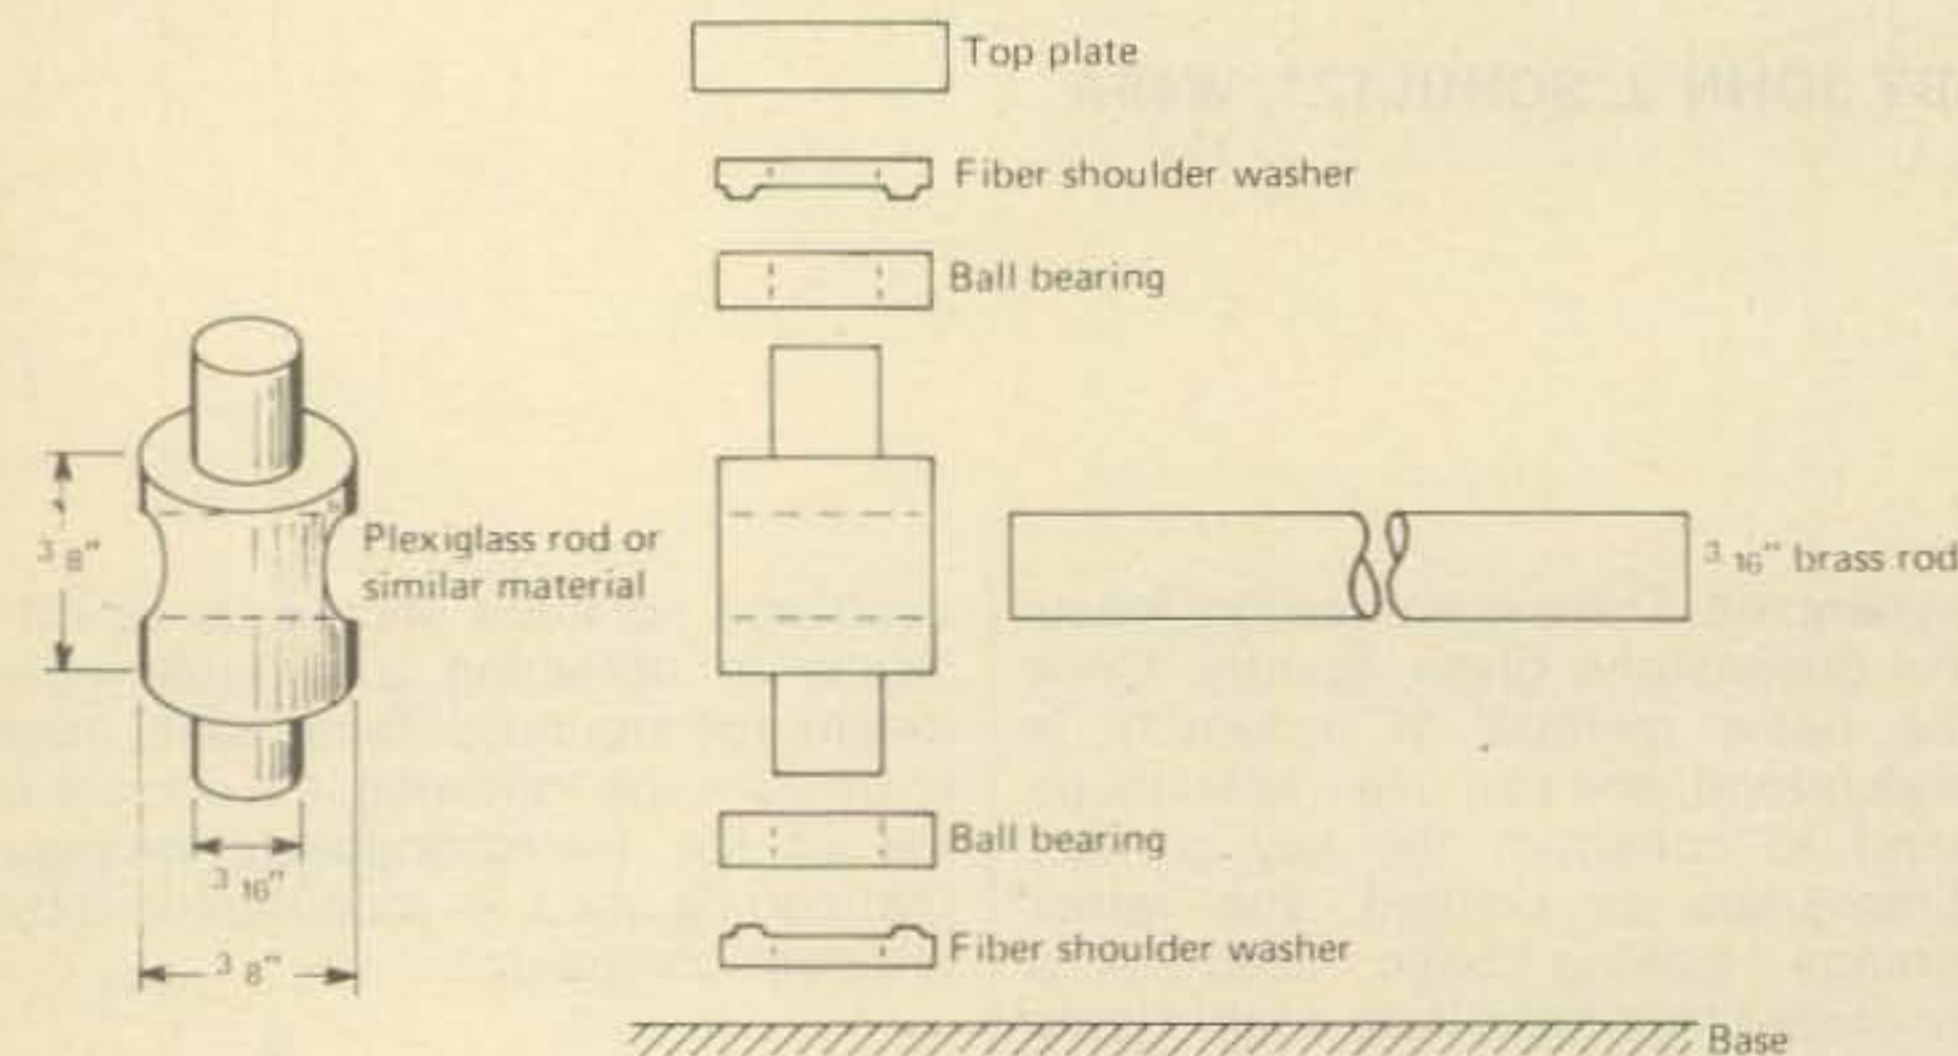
Details of the assembly of the bearing assembly for each arm.
